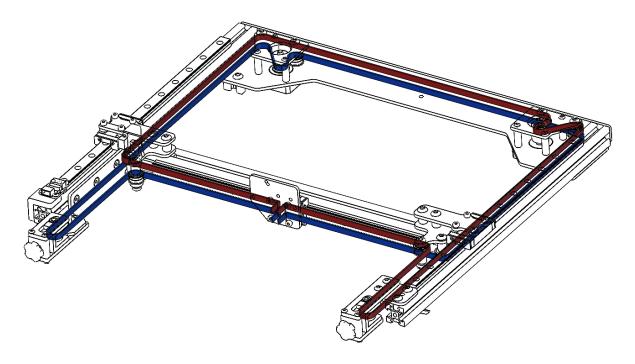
Belt Scheme, Blue: motor A, Red: motor B.
